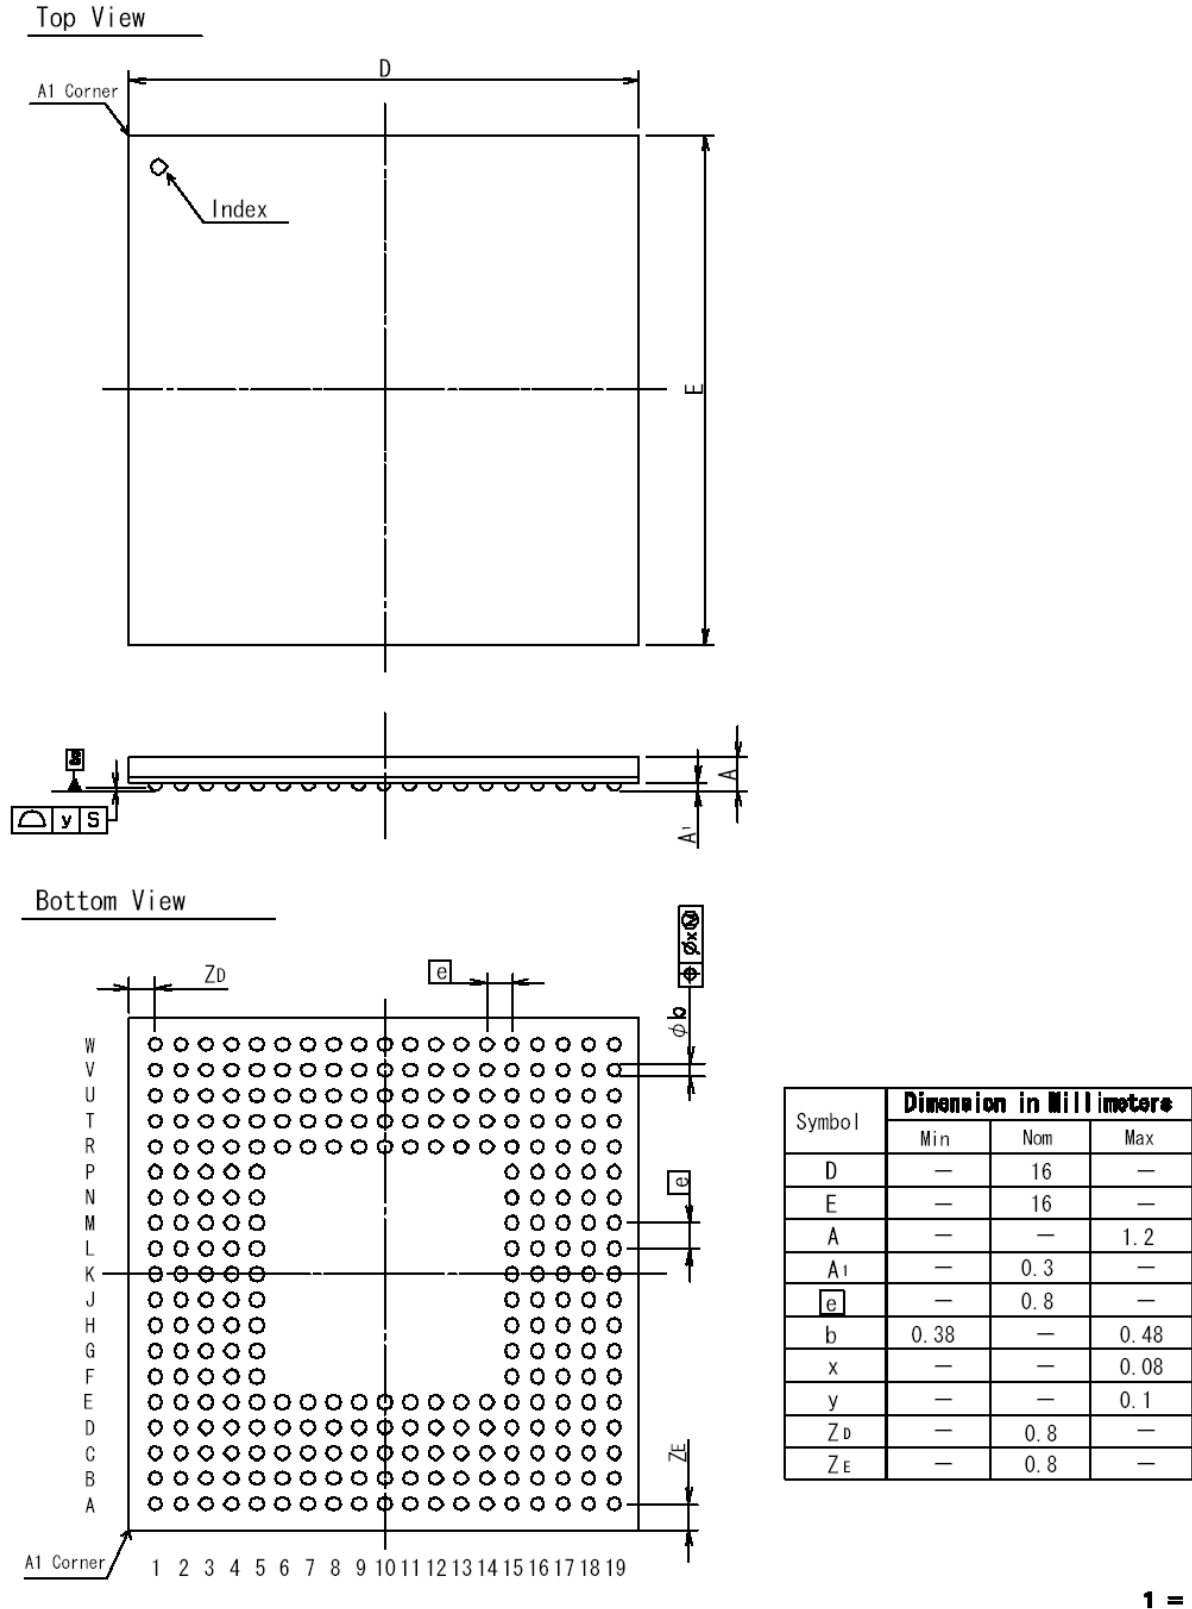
Package Dimensions (PFBGA16U-280PIN)
